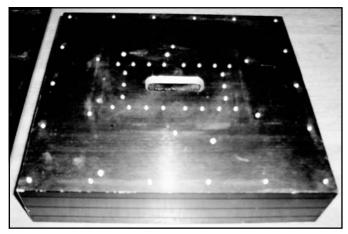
Heat sink with slot and tapped holes for mounting the PC board and components.
